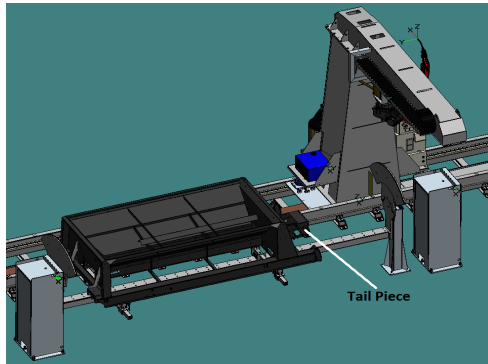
Welding robot at home position with 3600 Roro-Belt on the rotary axis.
